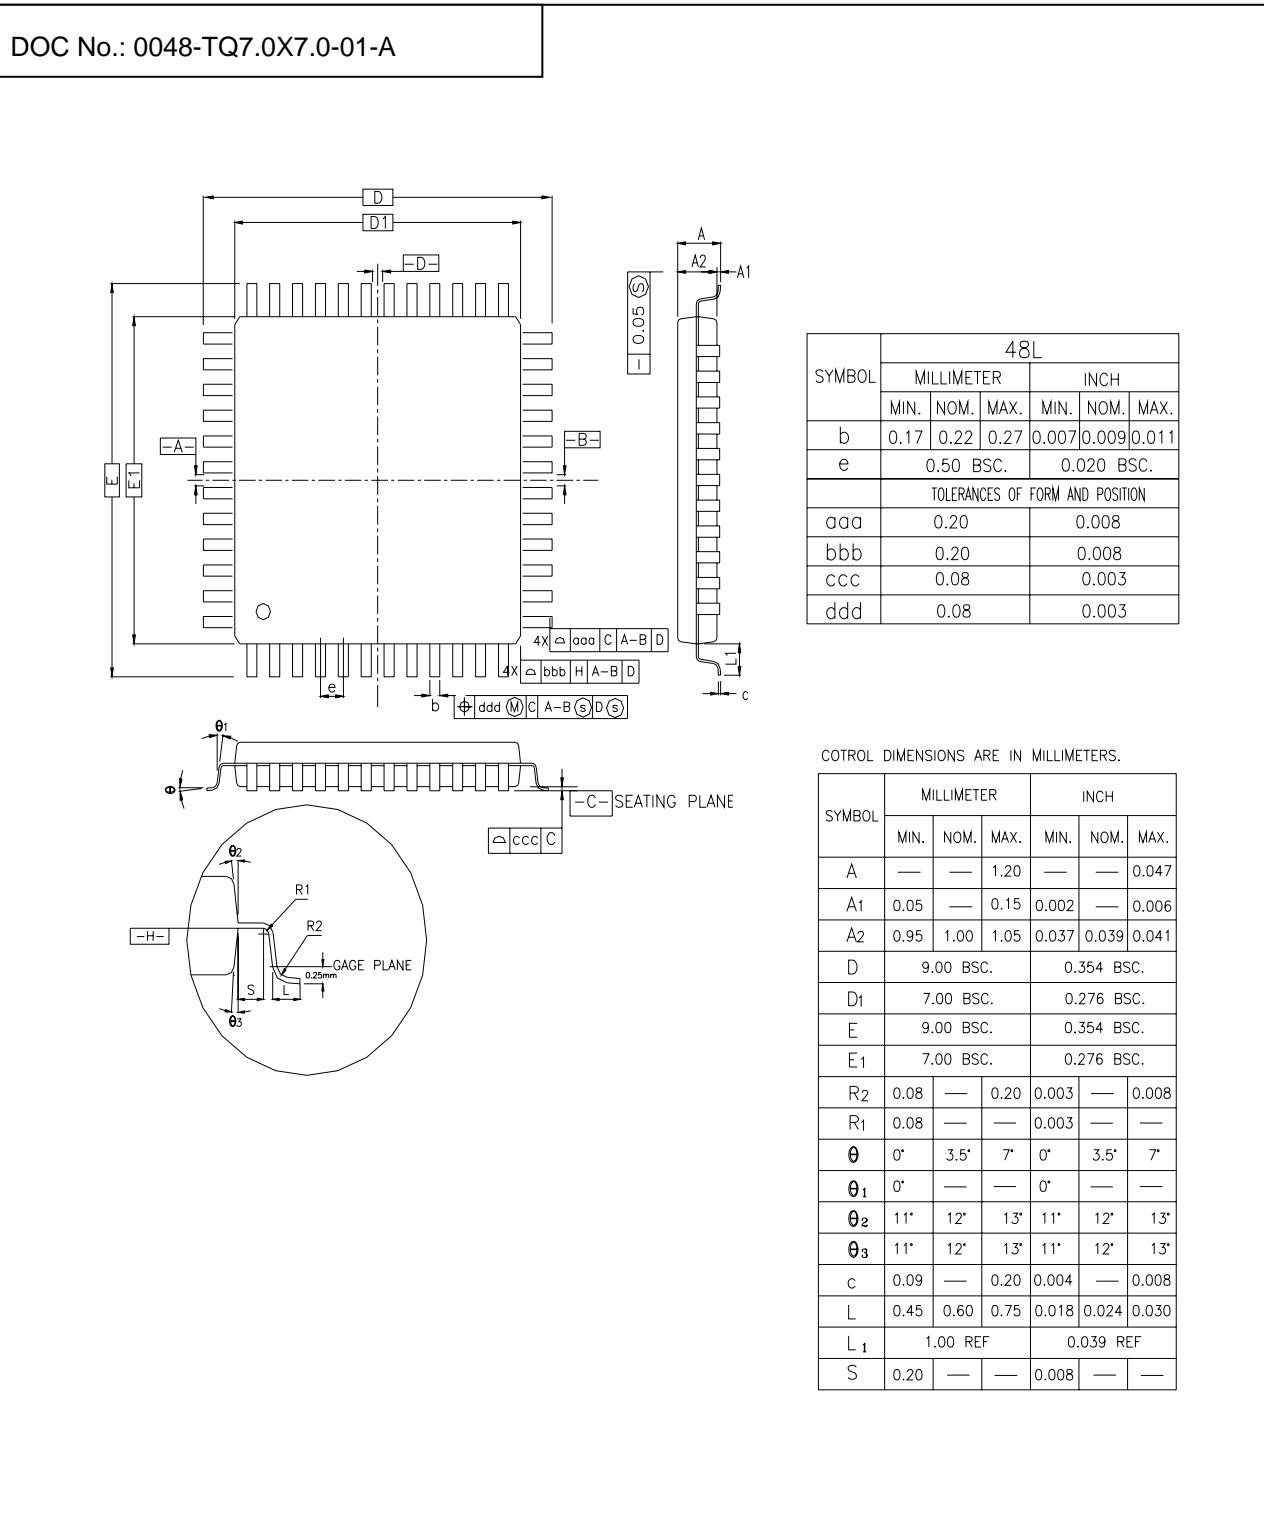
48 Pin TQFP 7.0x7.0x1.0 mm Package Outline Dimension
